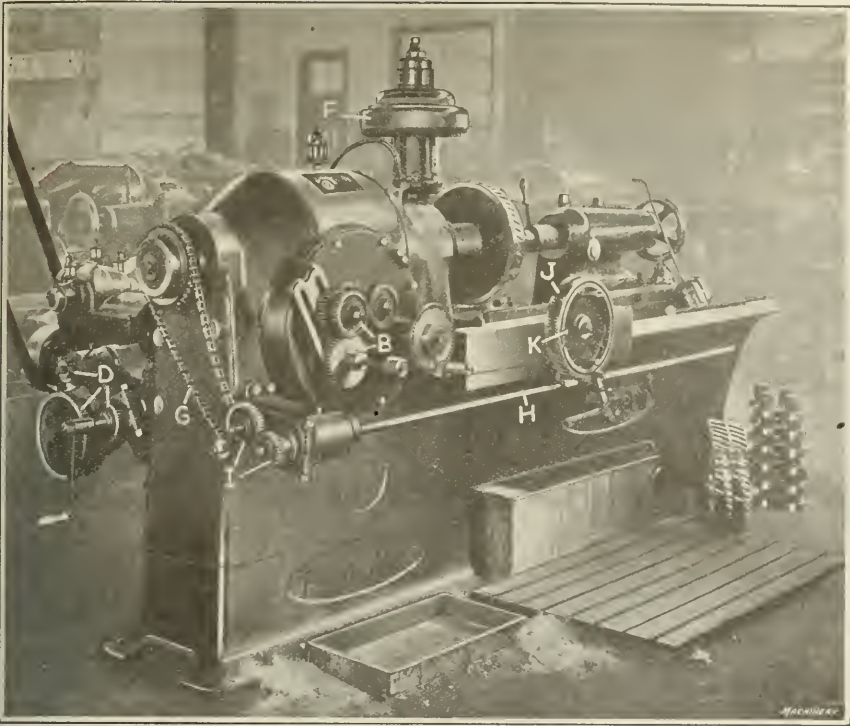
Machine shown in Fig. 1 set up for hobbing Worm-wheels
